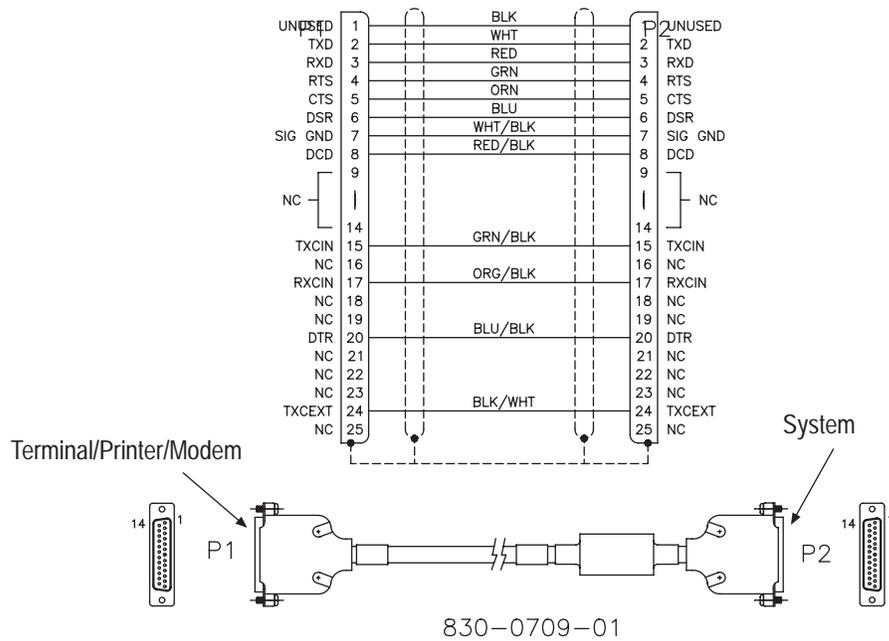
Man-Machine Interface Port Cable (P/N 830-0708-01)
